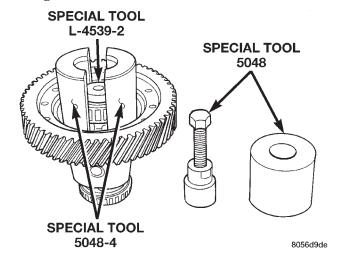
Position Button and Collets Onto Differential and Bearing (Ring Gear Side)
